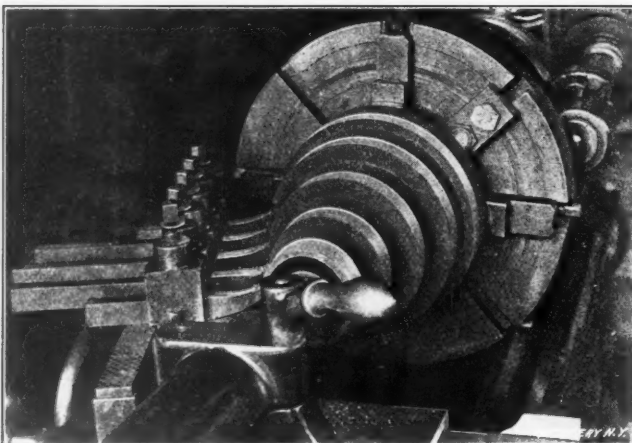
Turning the Outside of a Cone Pulley with Gang Tools
